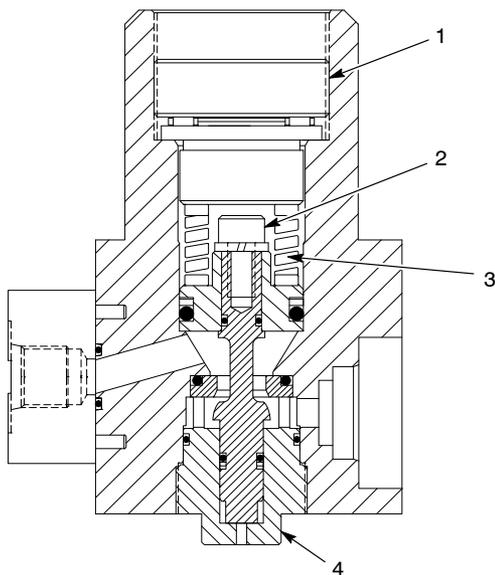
AG-900+/AG900+S Applicator Regulator Assembly
